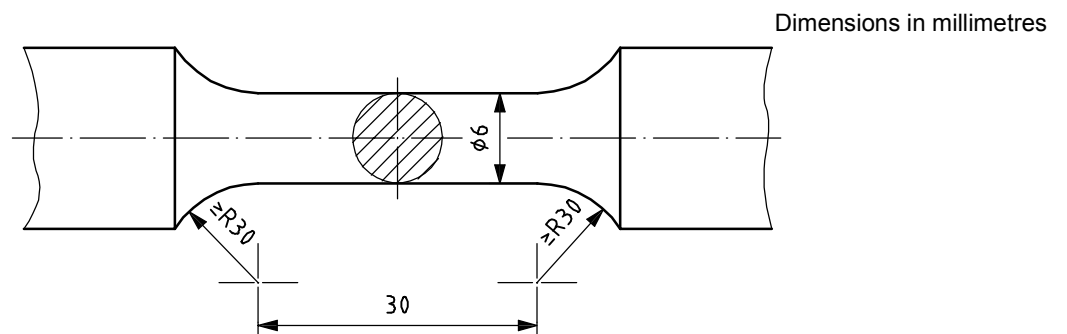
Shape and dimensions of test specimen in accordance with JIS R 1606 [2] and KSL 1599 [3]
